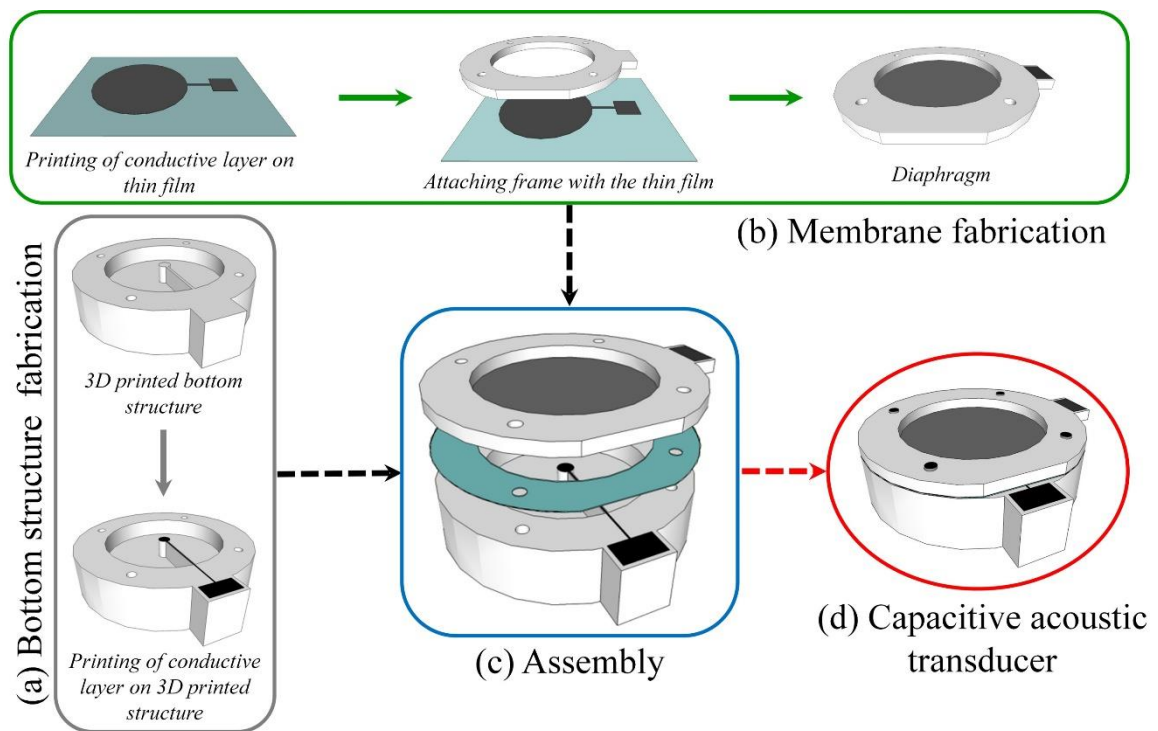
Fabrication steps of the acoustic sensor combining inkjet printing and 3D printing technique.
